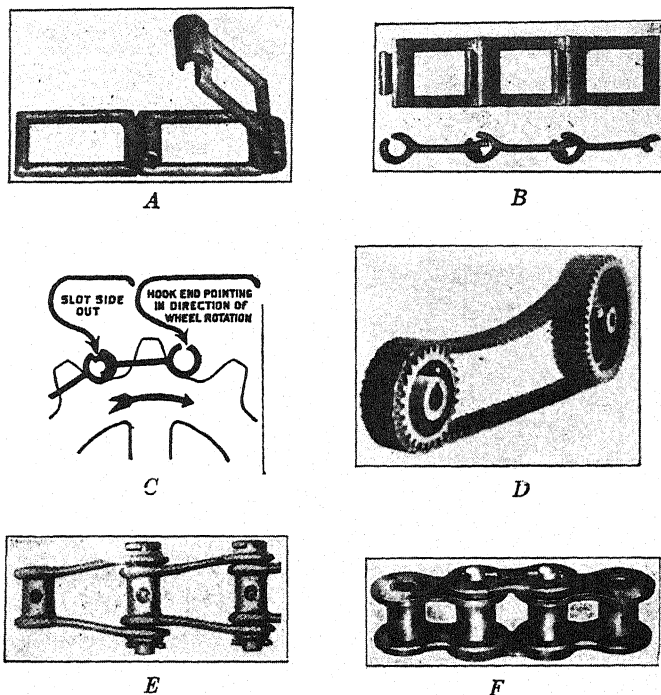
Common types of chains. A—Malleable-iron link belt or chain. B—Steel chain. C—Showing how steel chain should be placed on sprocket. D—Silent chain. E—Pintle chain. F—Roller chain.
